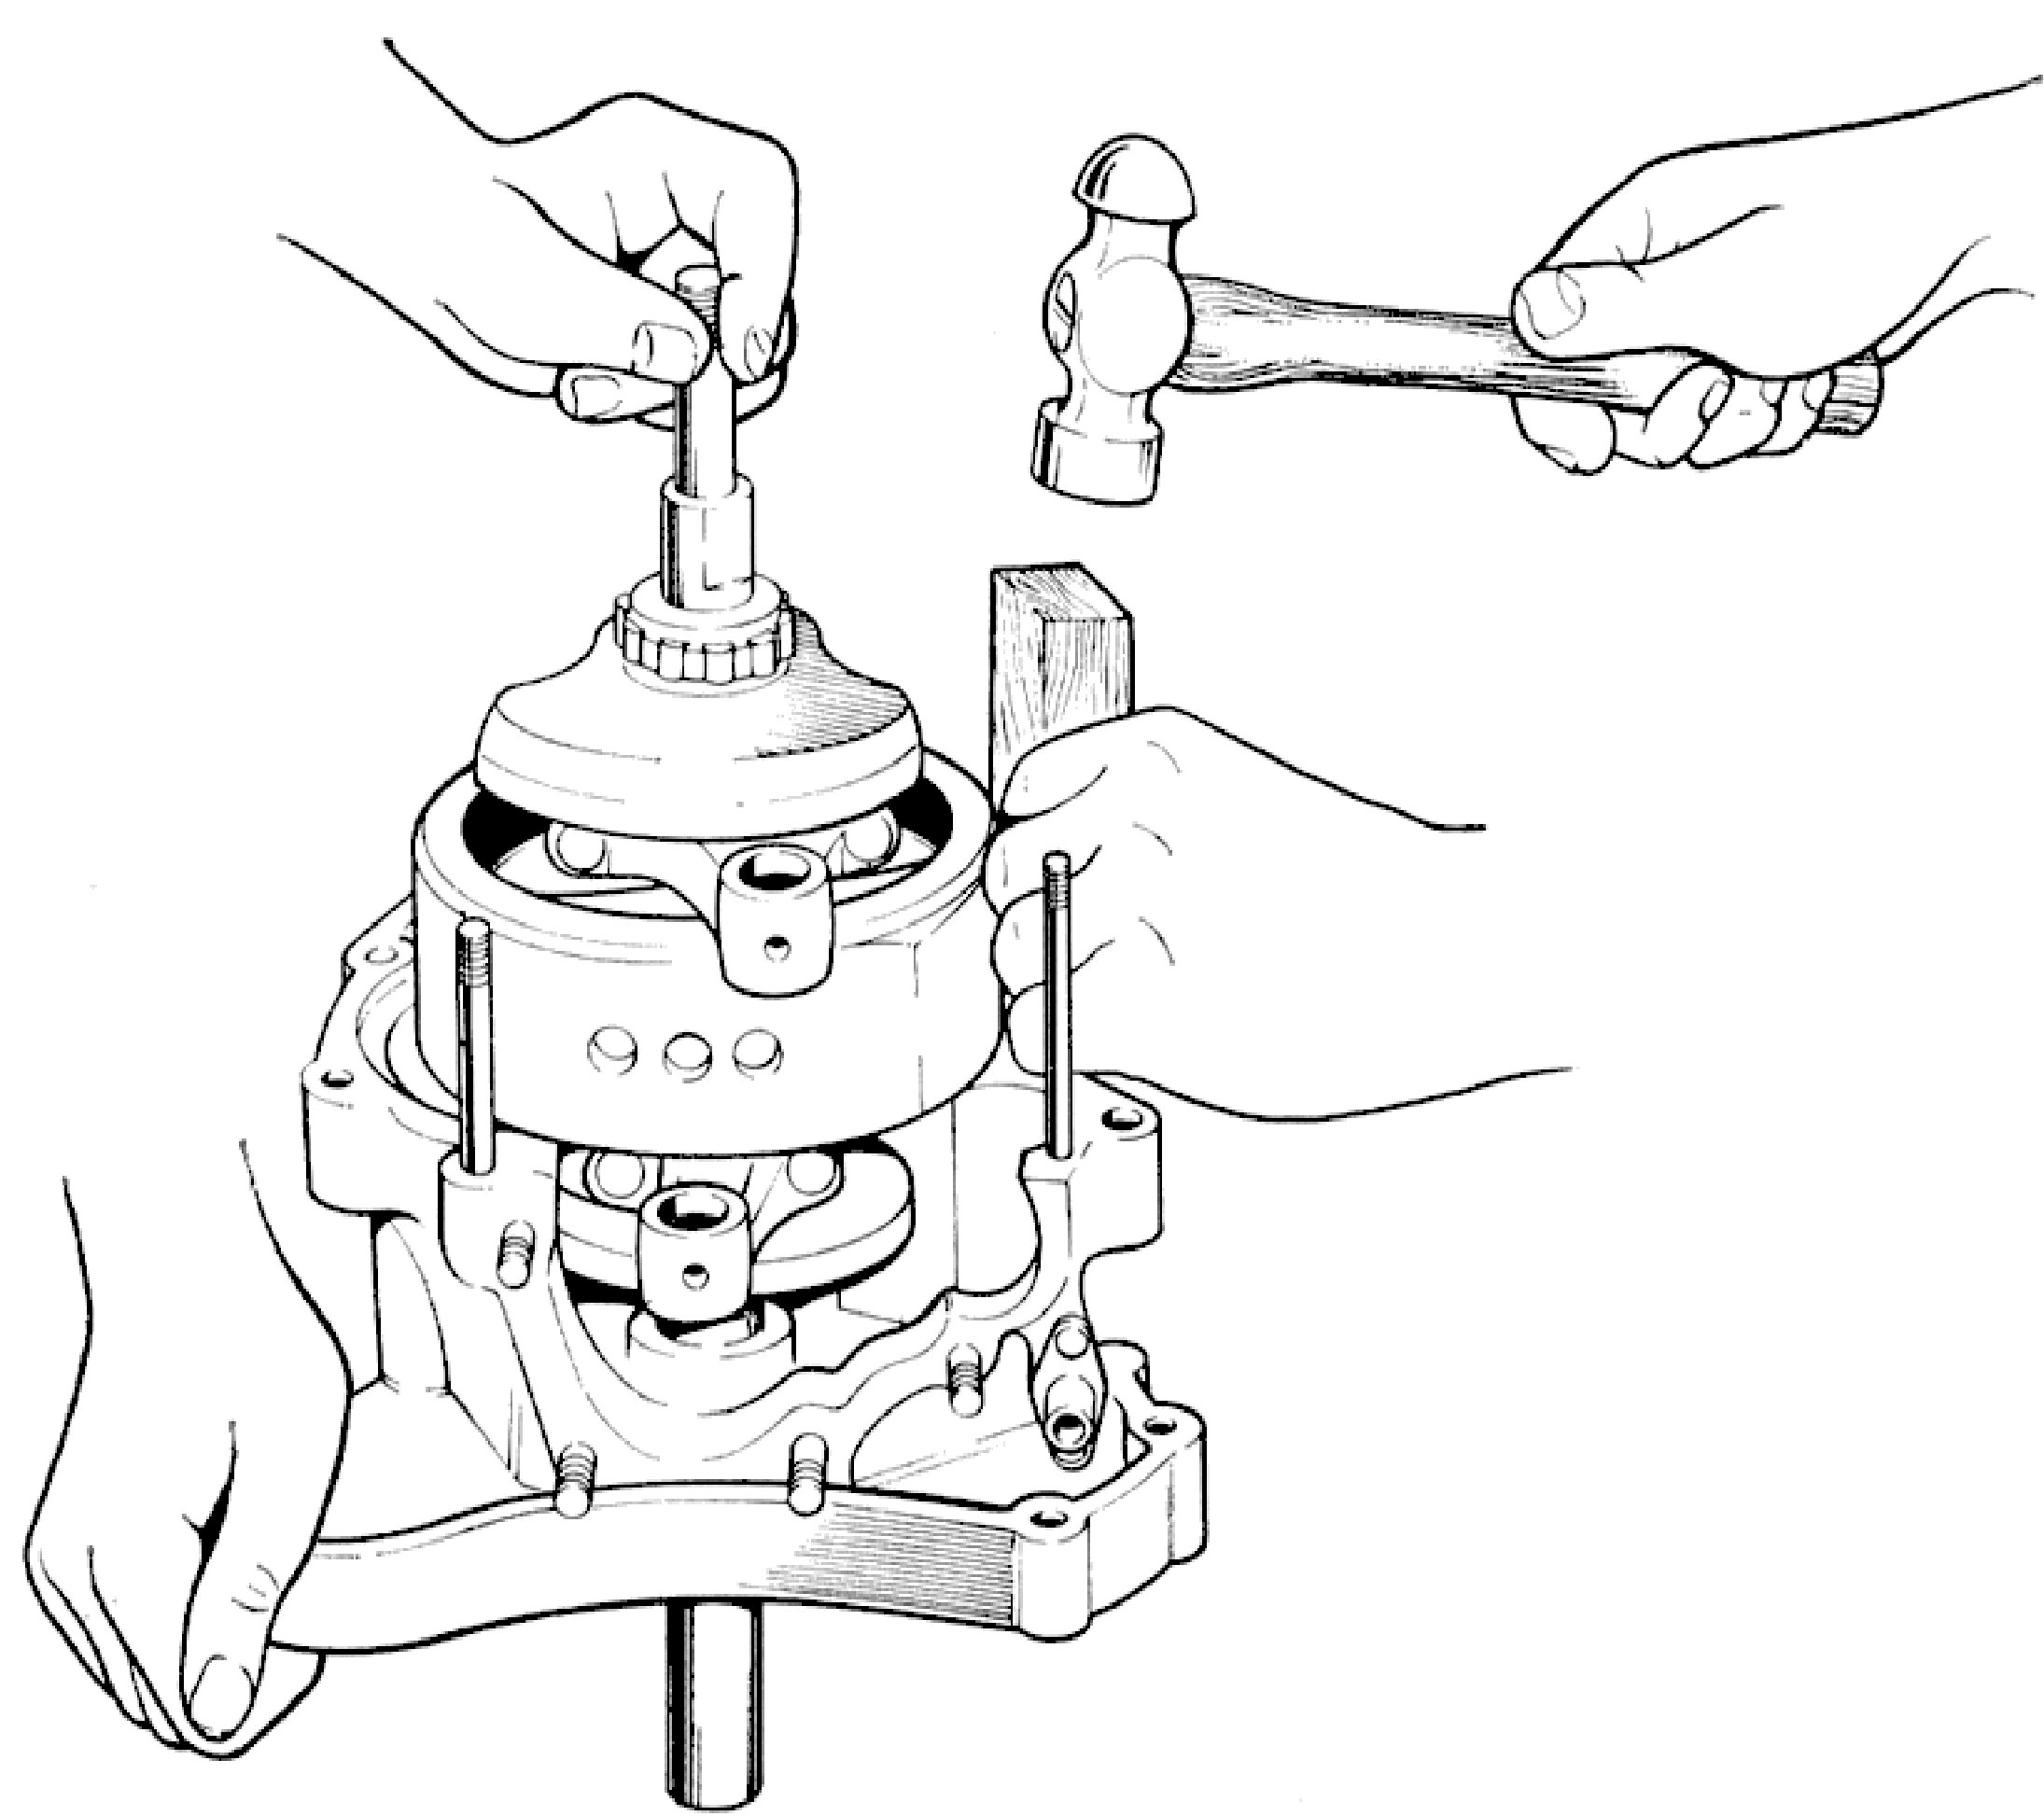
Parting the crankcases using a wood block against the inner drive side
